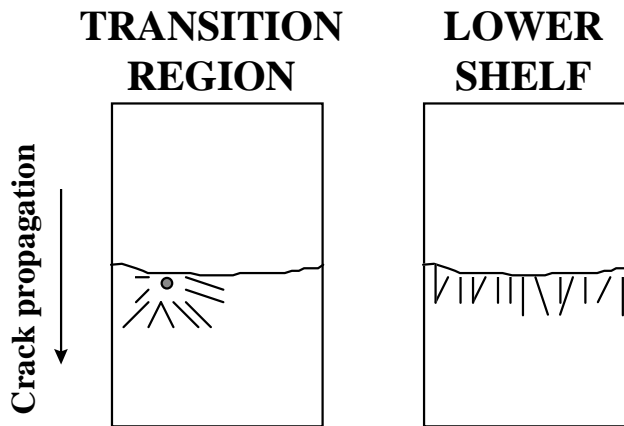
Typical cleavage fracture surfaces for fatigue precracked specimens.
